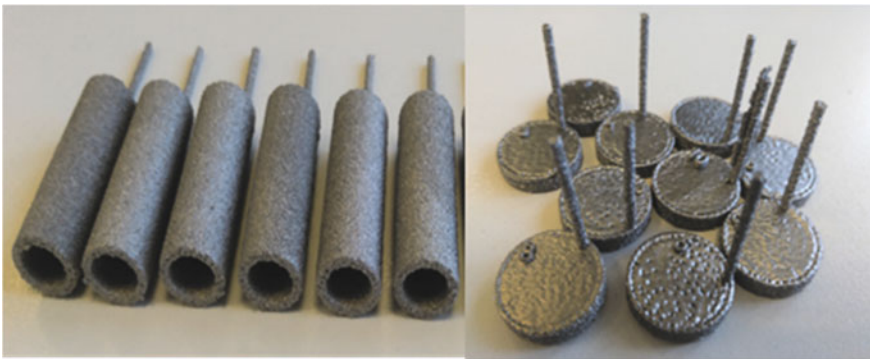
Example of visual inspection defects (*Source AIDIMME*)
